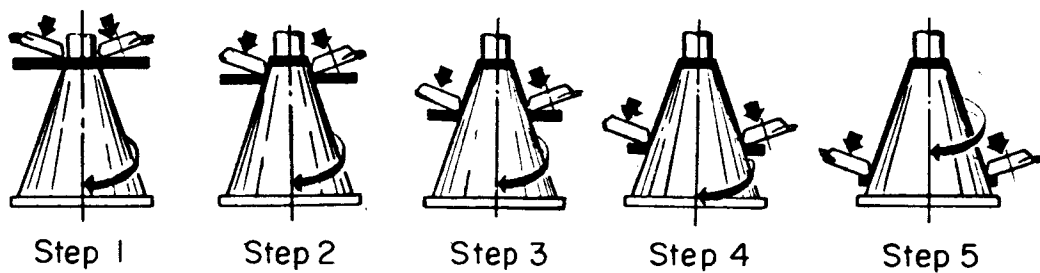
STEPS IN SHEAR FORMING A CONE (REF. 75)
